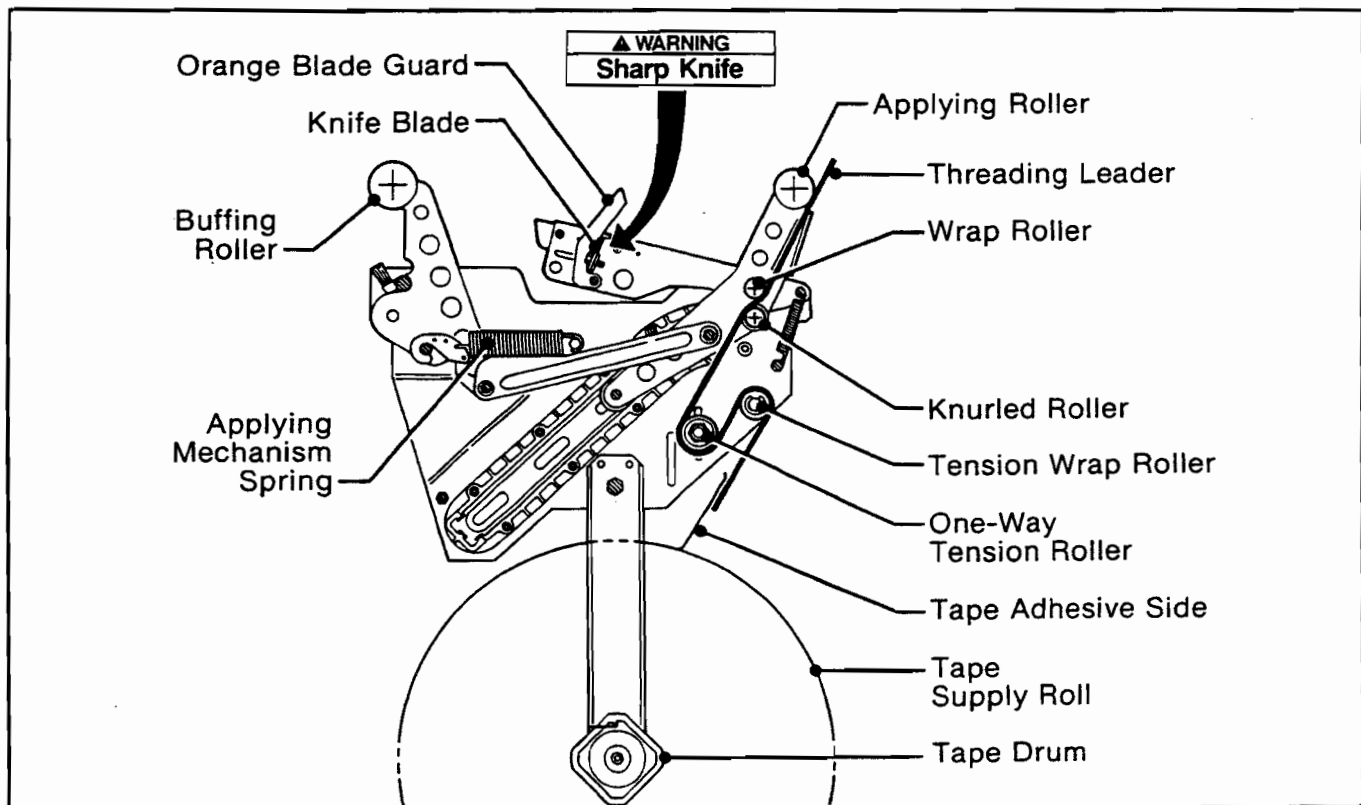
Tape Threading Diagram 800a/800a3/800ab - Lower Taping Head - Left Side View
